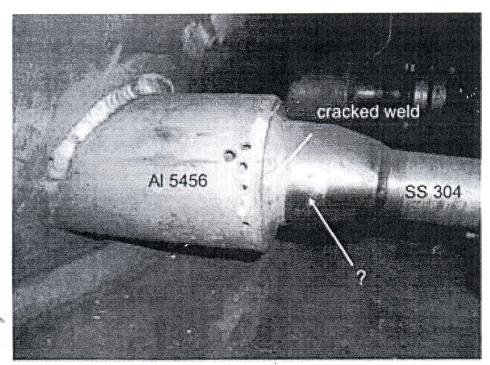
Cracked Weld in a Reduction Tube
